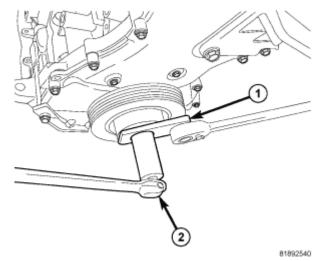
Damper Removal Courtesy of CHRYSLER LLC
